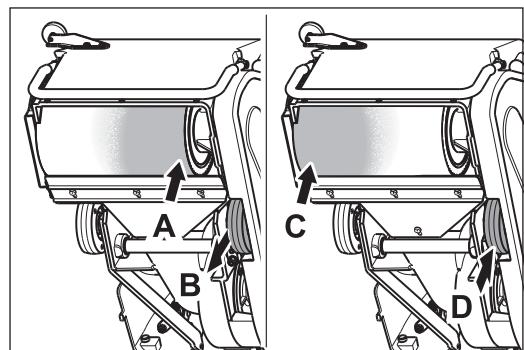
If the machine is sanding more heavily on side A, the wheel must be adjusted in the direction of B. If the machine is sanding more heavily on side C, the wheel must be adjusted in the direction of D.
